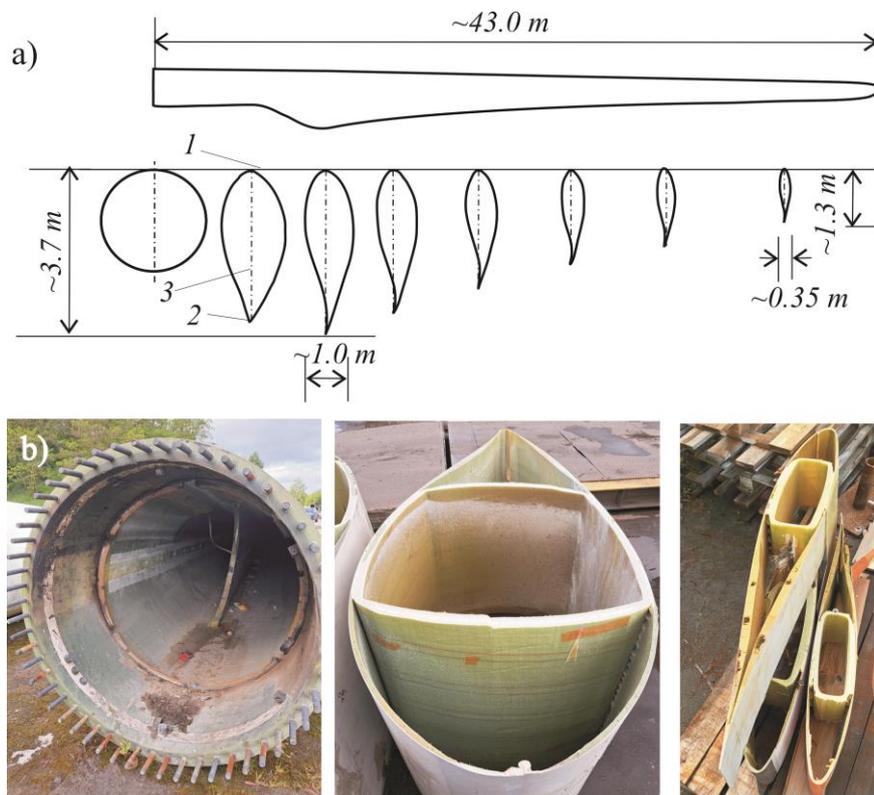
Cross-sections of wind turbine blades: a) change of cross-section along the blade (figure made on the basis of [34], b) blade cross-sections: circular cross-section near the column, “wide teardrop” transient section, “teardrop” section (photo - Ł. Jabłoński)
